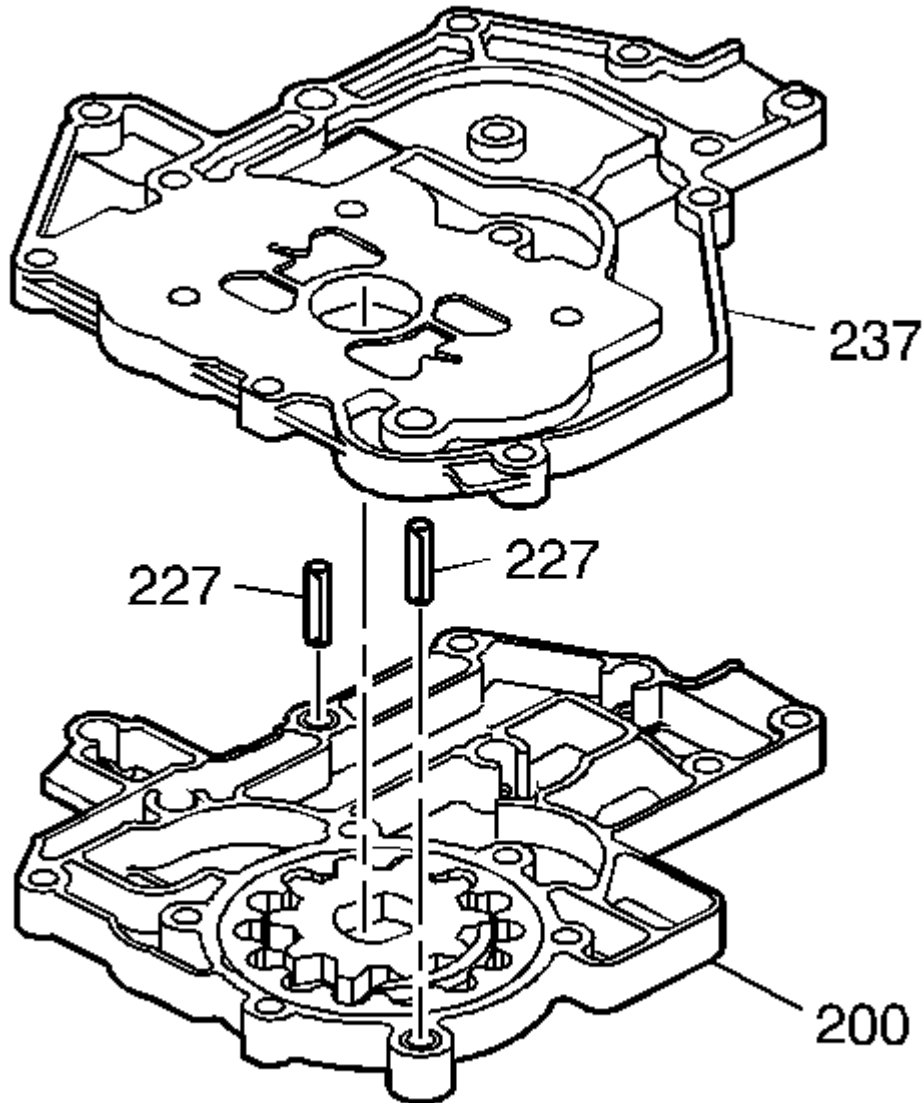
Installing Scavenge Pump Cover Onto Primary Pump Body
